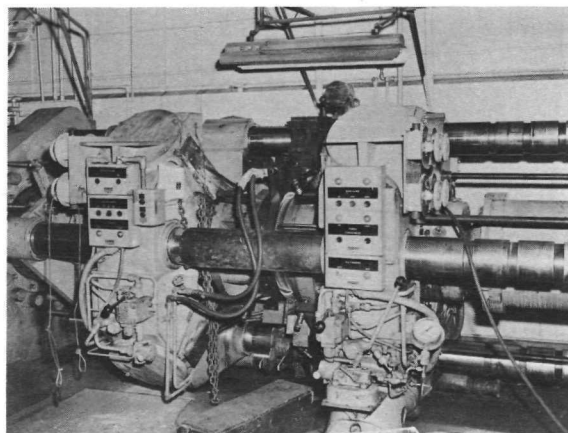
Apparatus for pressure gas welding.
